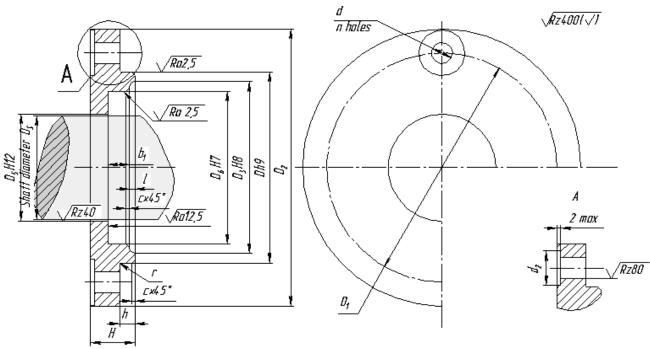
Dimensions of a bearing cap (GOST 18512-73)
